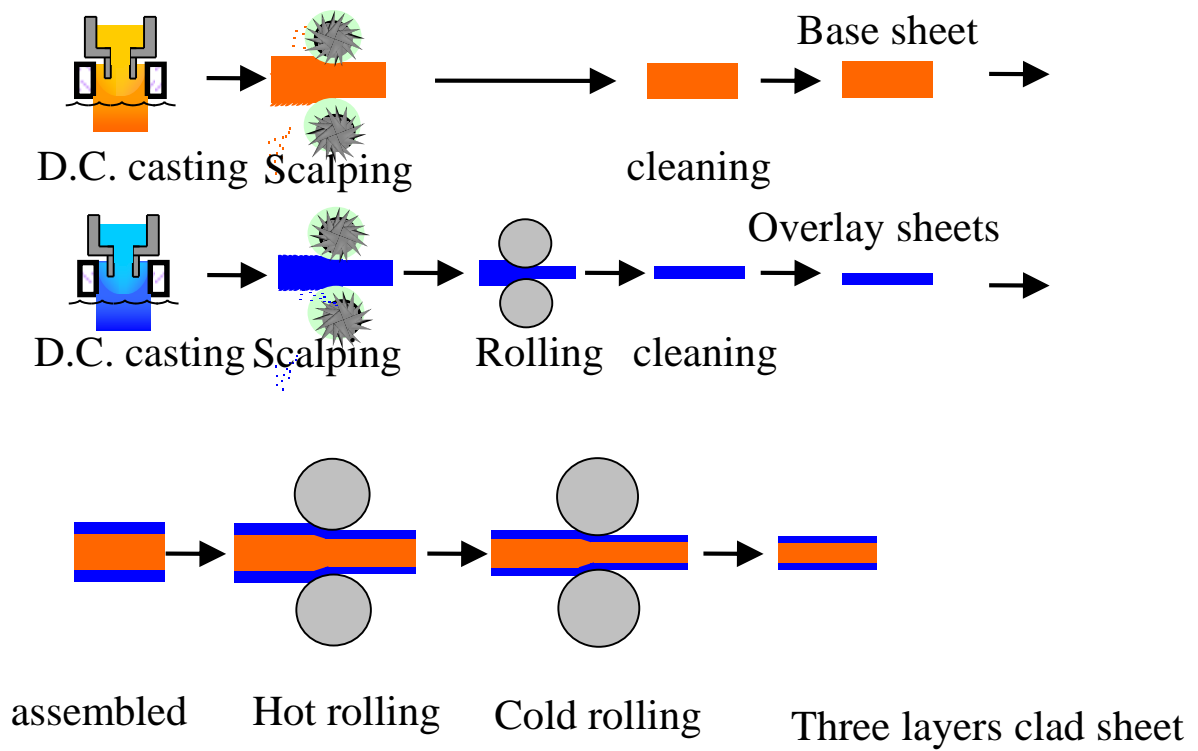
Fabrication route of the clad sheet using D.C. casting and hot roll bonding process.
